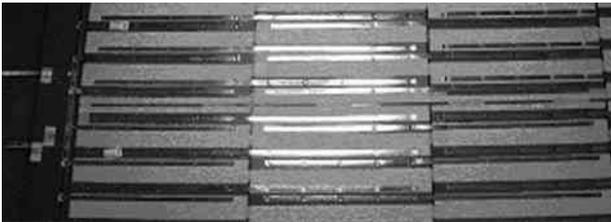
Soldered back- contacted cells with insulation pads on rear side
